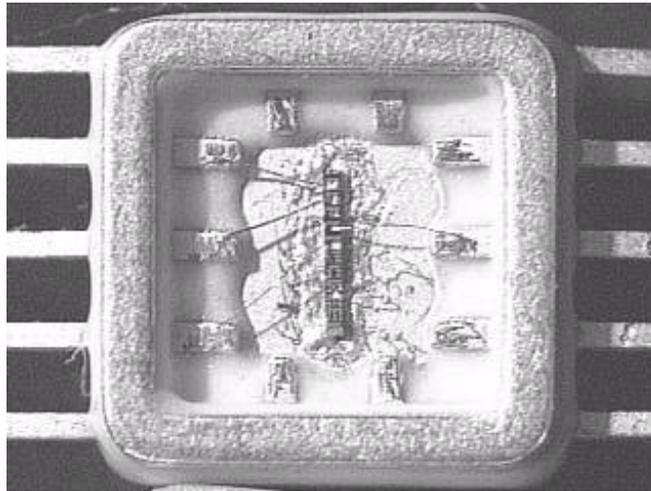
First-generation packaged set of devices. The devices (middle) were cleaved and mounted in the base with InSn solder alloy. A wedge bonder was used for wire bonding with 1 mil diameter wire. The package itself is ceramic with a gold alloy casing and bond pads.
